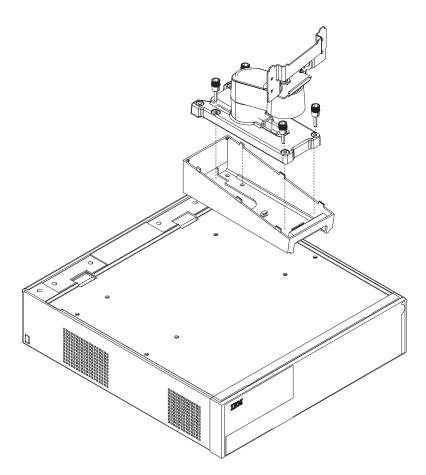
Securing the arm assembly to the SurePOS 720, 740, 780
